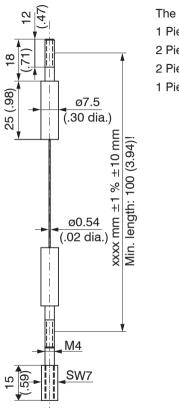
Attachment head GK1-WDS, dimensions in mm (inches)
